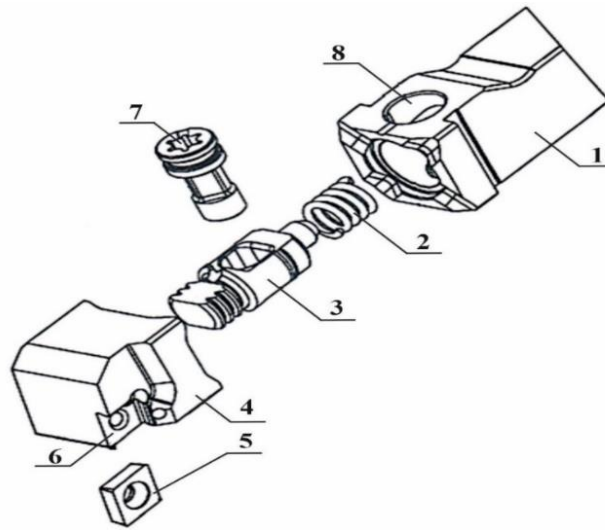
Scheme of quick-change toolholder ISCAR WO [104]
